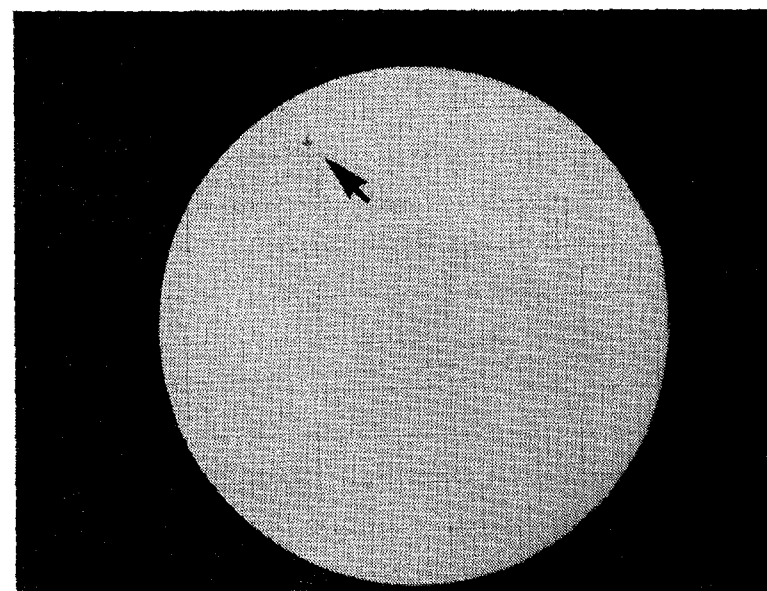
A Macroscopic View of a Polished Section of an End-Plug With a Porosity Defect (Arrowed)
